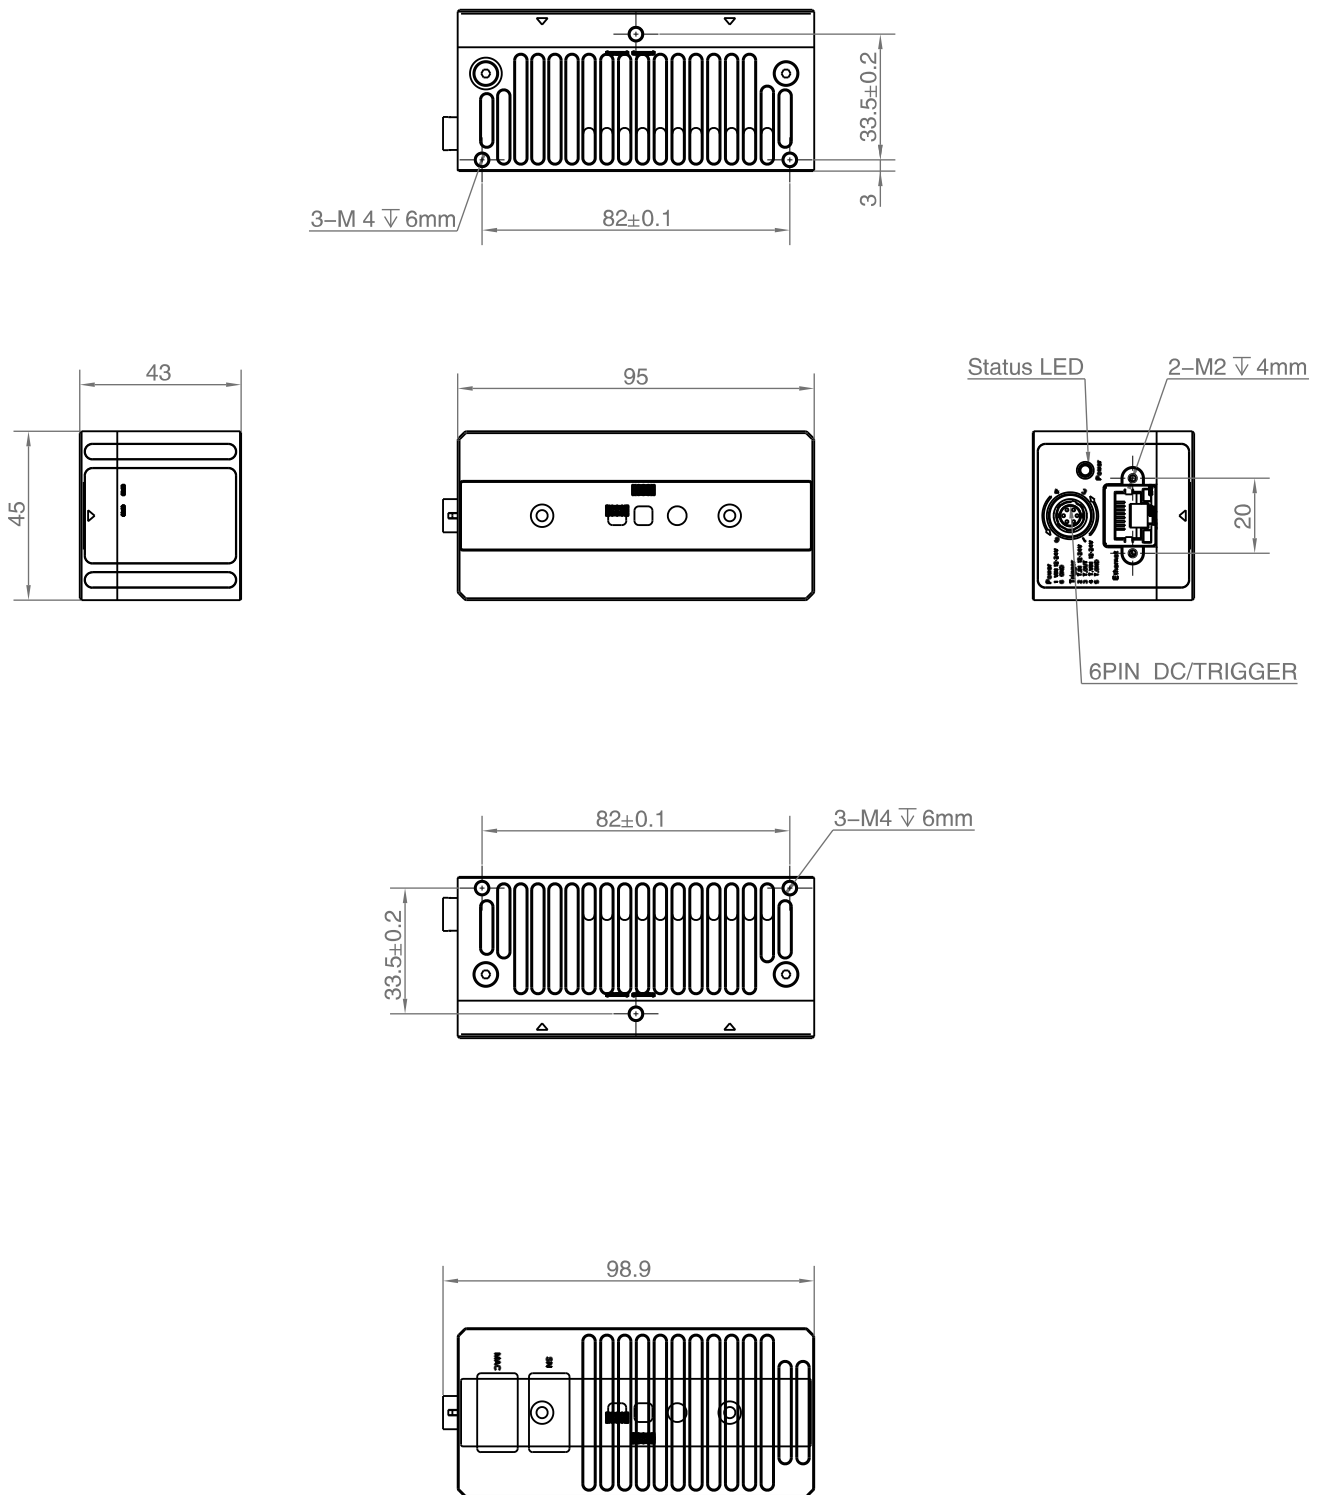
FS820-E1 Mechanical dimensions (unit: mm)
